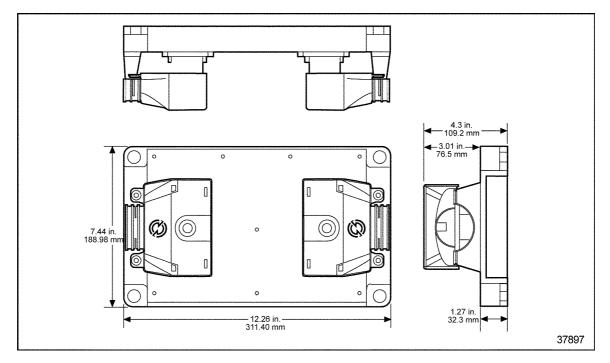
Dimensions of Electronic Control Unit with Connector Shrouds
